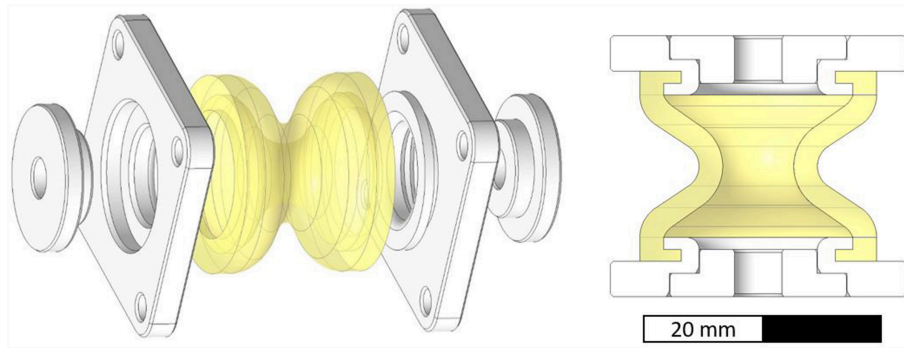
| Exploded (left) and sectional (right) view of PolyJet printed bellows structure for relaxation testing. The bellows (yellow) and square shaped flanges (white) are printed into one multi-material part.
